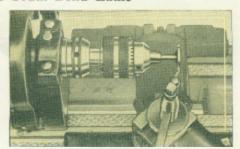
The valves used by Ford, Chevrolet, Whippet, Overland and others, do not have a center hole in the head. For refacing these valves, chuck the valve stem close to the head, using a hollow spindle chuck as shown above.
